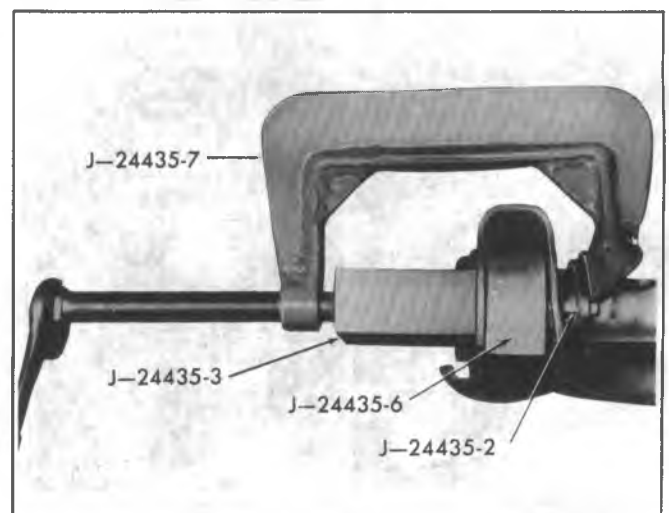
C-25--L.C.A. Rubber Bushing Removal
